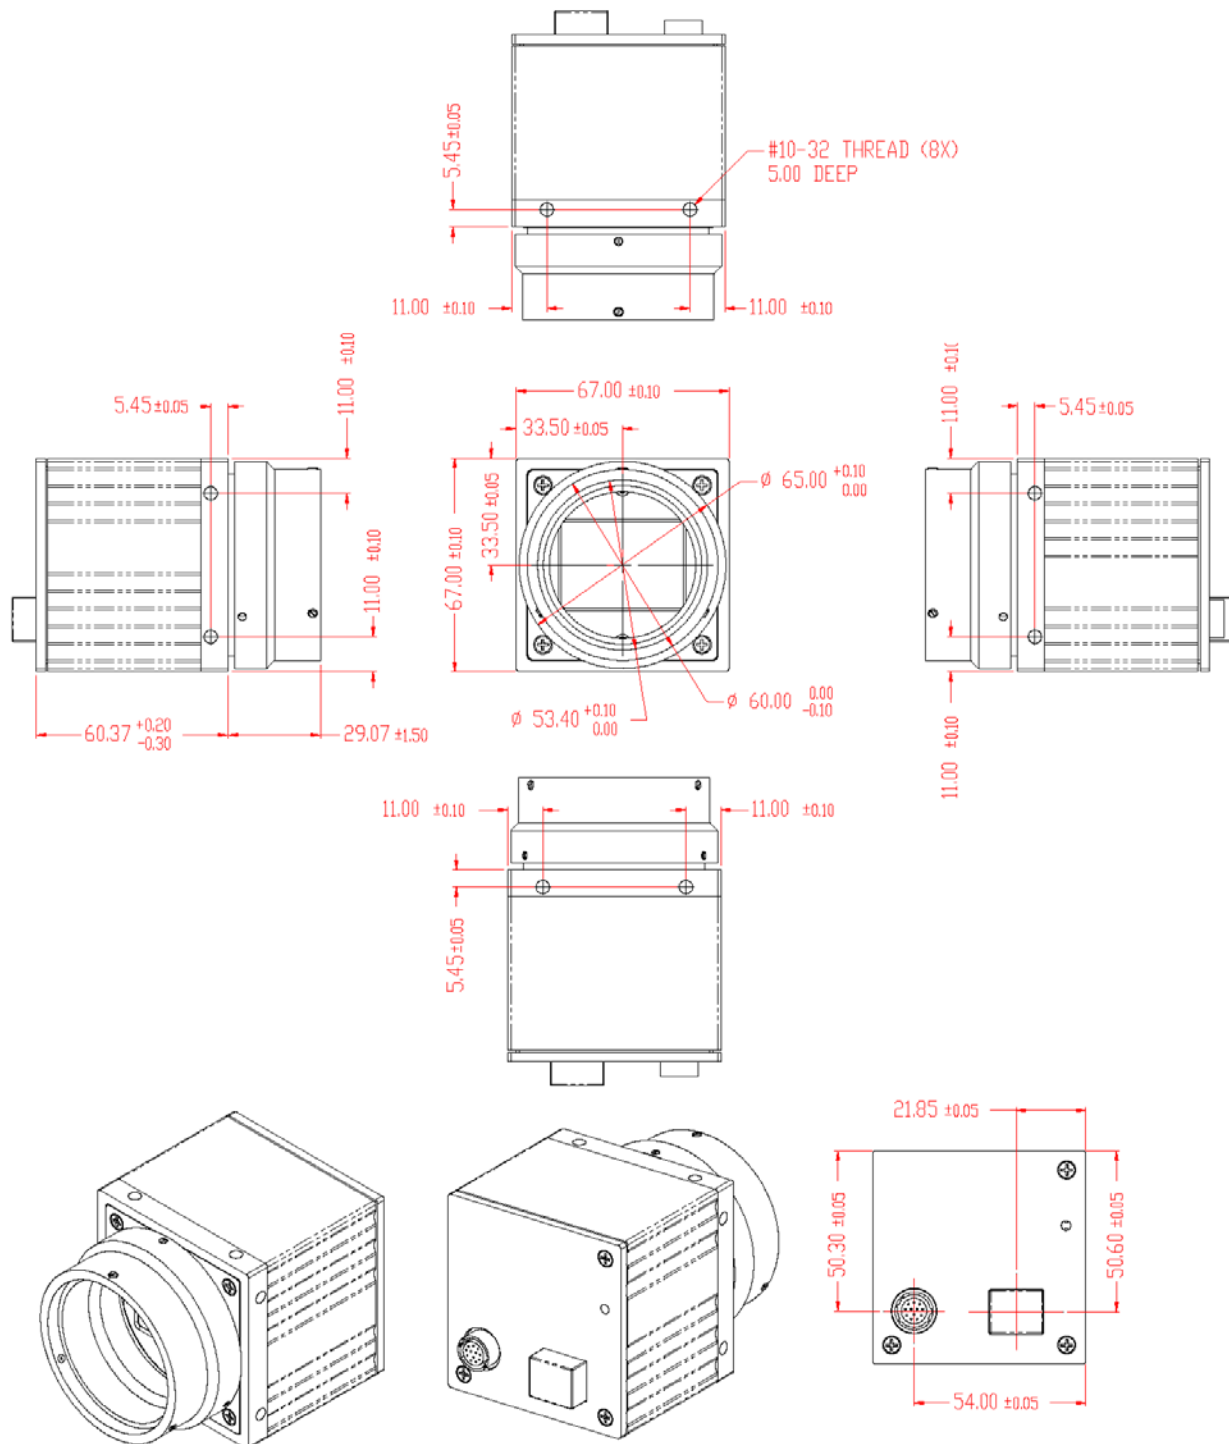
IPX-4M15-G Dimensional Drawings
